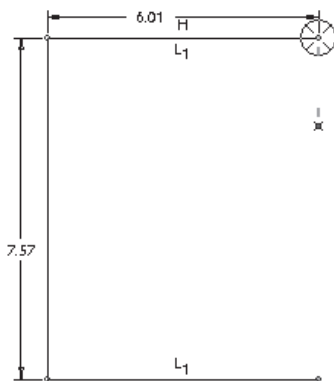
Cursor moved out of Target symbol perpendicular to the endpoint
